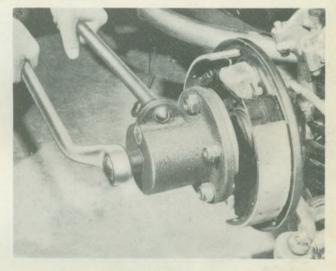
Removing front hub with approved extractor —Tool No. 20S.86.
